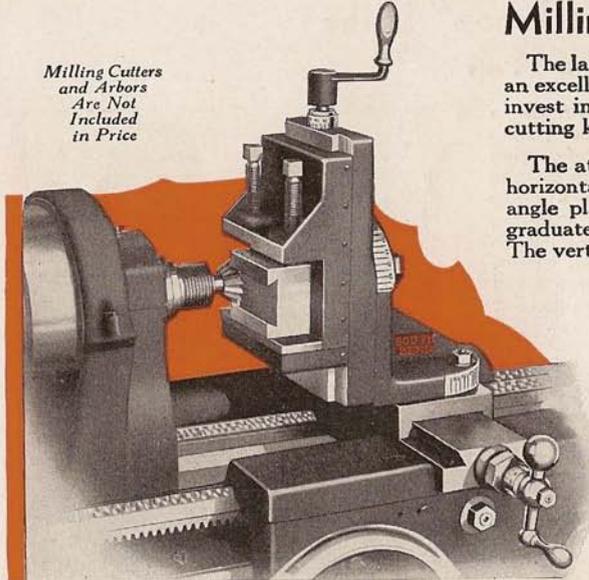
Milling a Dovetail on Lathe Using Milling Attachment
